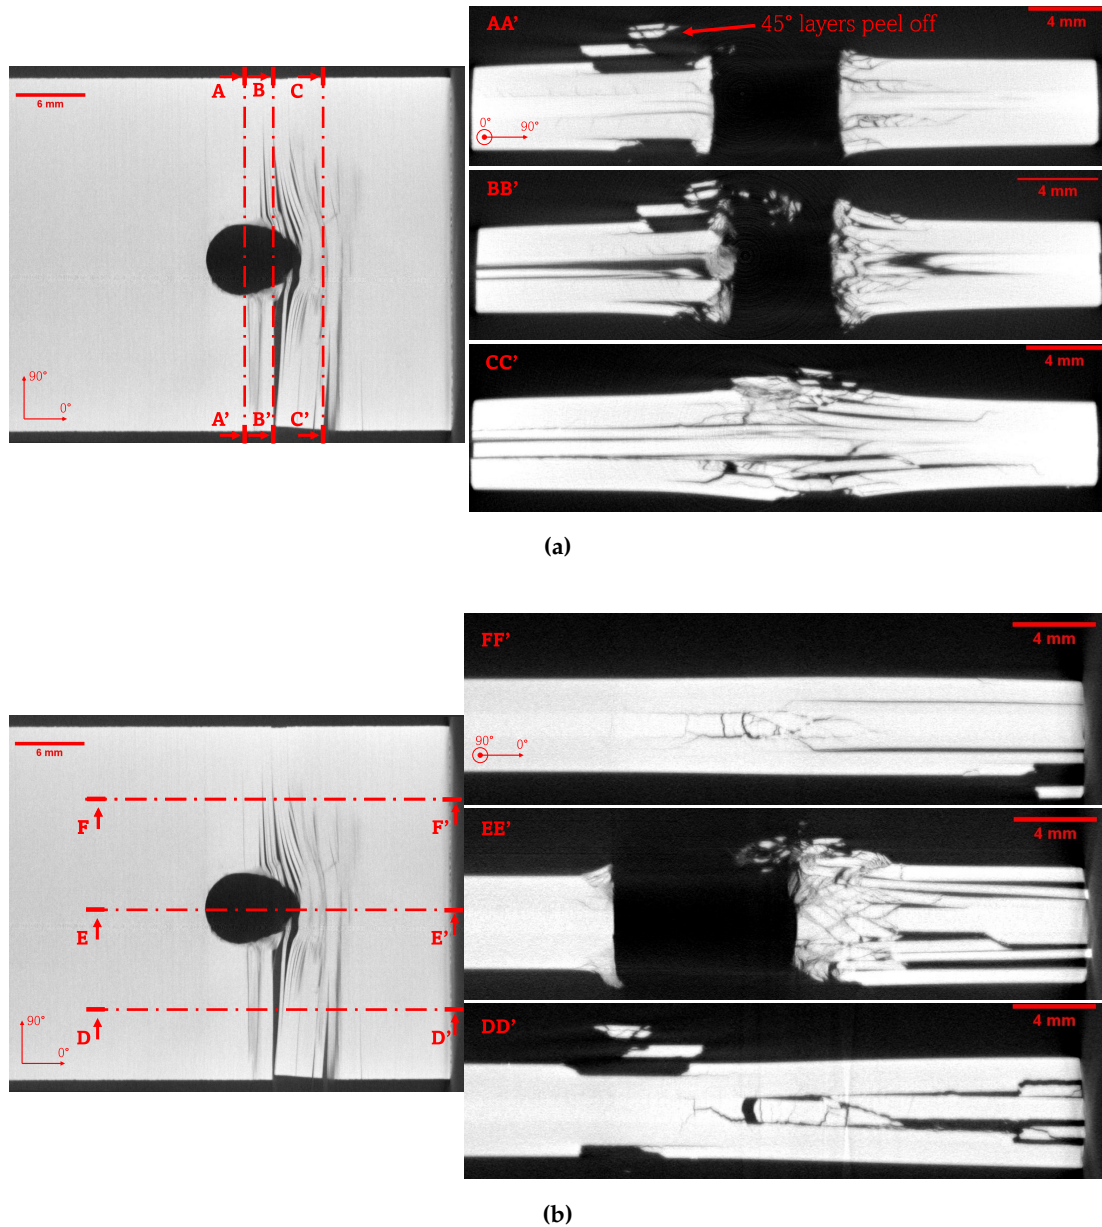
XCT scans of a pin load specimen cross-sections without binding tested until failure. (a) Cross-sectional view of the width of the specimen. (b) Cross-sectional view of the length of the specimen.
